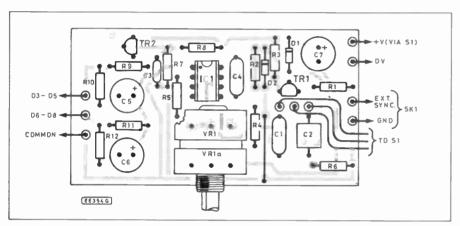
Component layout on the printed circuit board. The integrated circuit IC1 should be mounted on the board via an i.c. socket.
